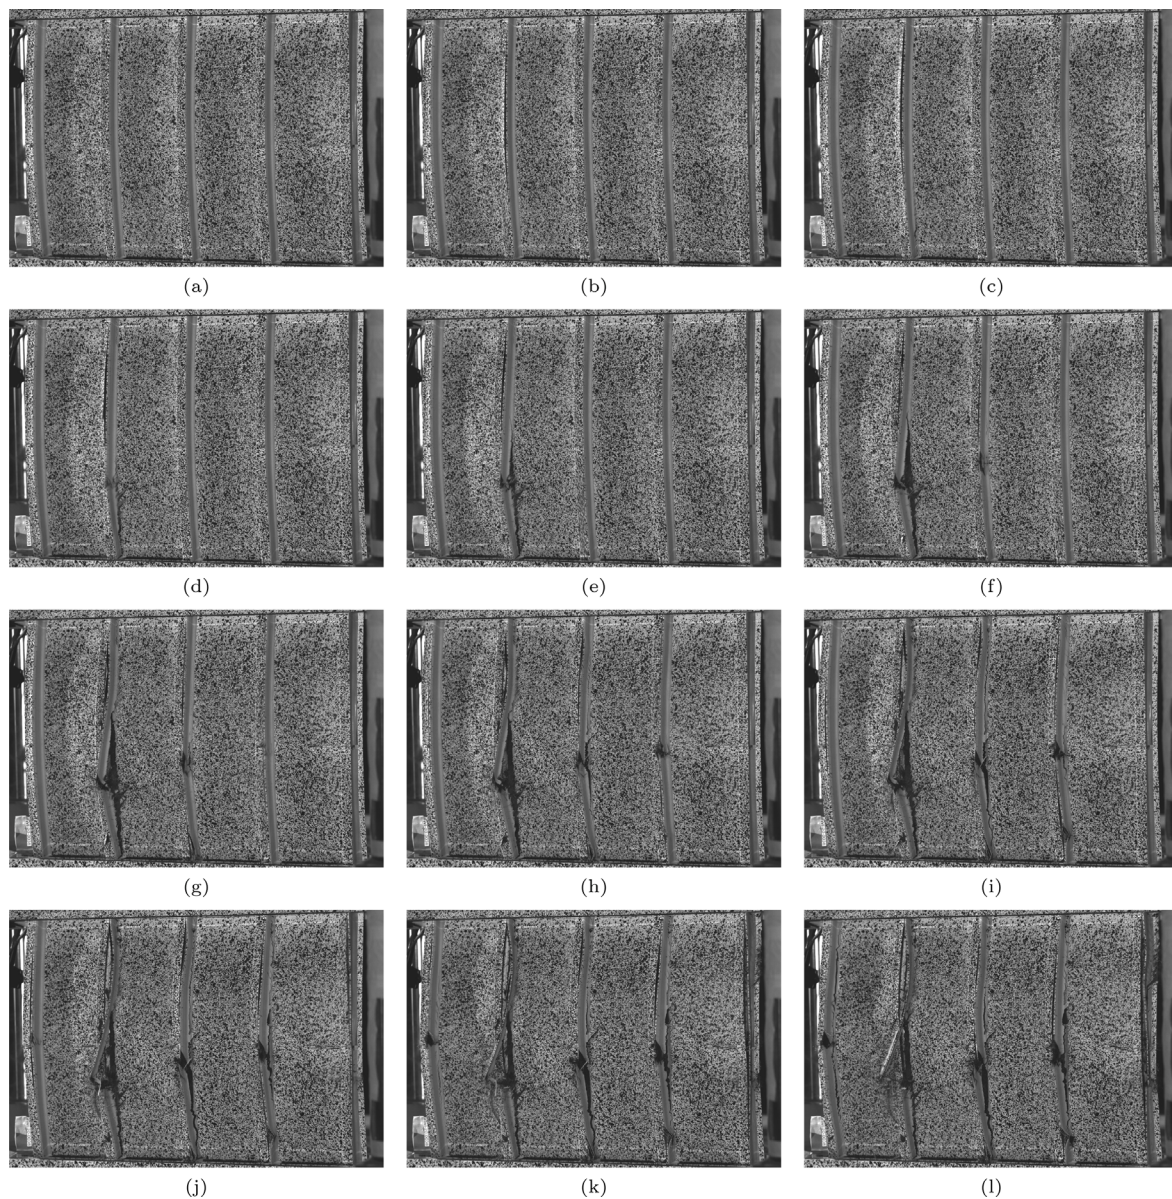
High-speed footage panel 2: (a–b) stringer 2 cap separation; (c) stringer 2 butt-joint failure; (d) stringer 2 web fracture; (e) stringer 3 cap separation; (f) stringer 3 butt-joint and web failure, stringer 4 cap separation; (g) stringer 4 butt-joint failure; (h–i) stringer 4 fracture, stringer 1 cap separation; (j) stringer 5 cap separation, stringer 1 web fracture; (k) stringer 1 and 5 butt-joint failure; (l) stringer 5 web fracture.
